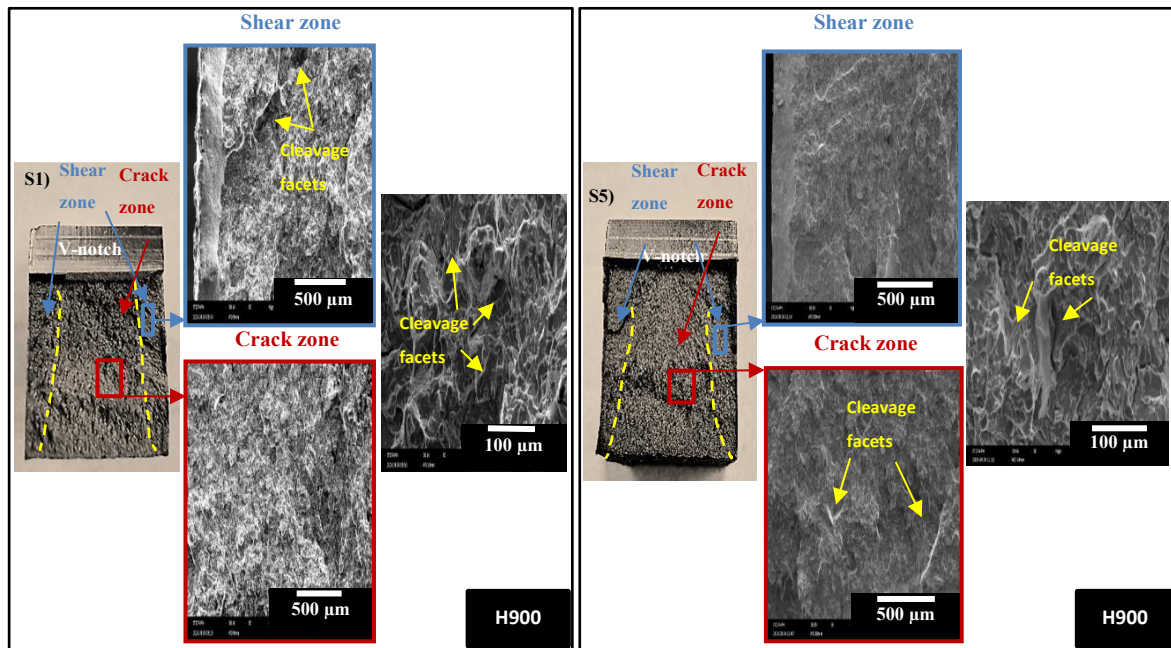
SEM fractography of Charpy impact fracture surfaces of 17-4 PH stainless steel specimens aged at H900. (a) Specimen S1, (b) specimen S5.
